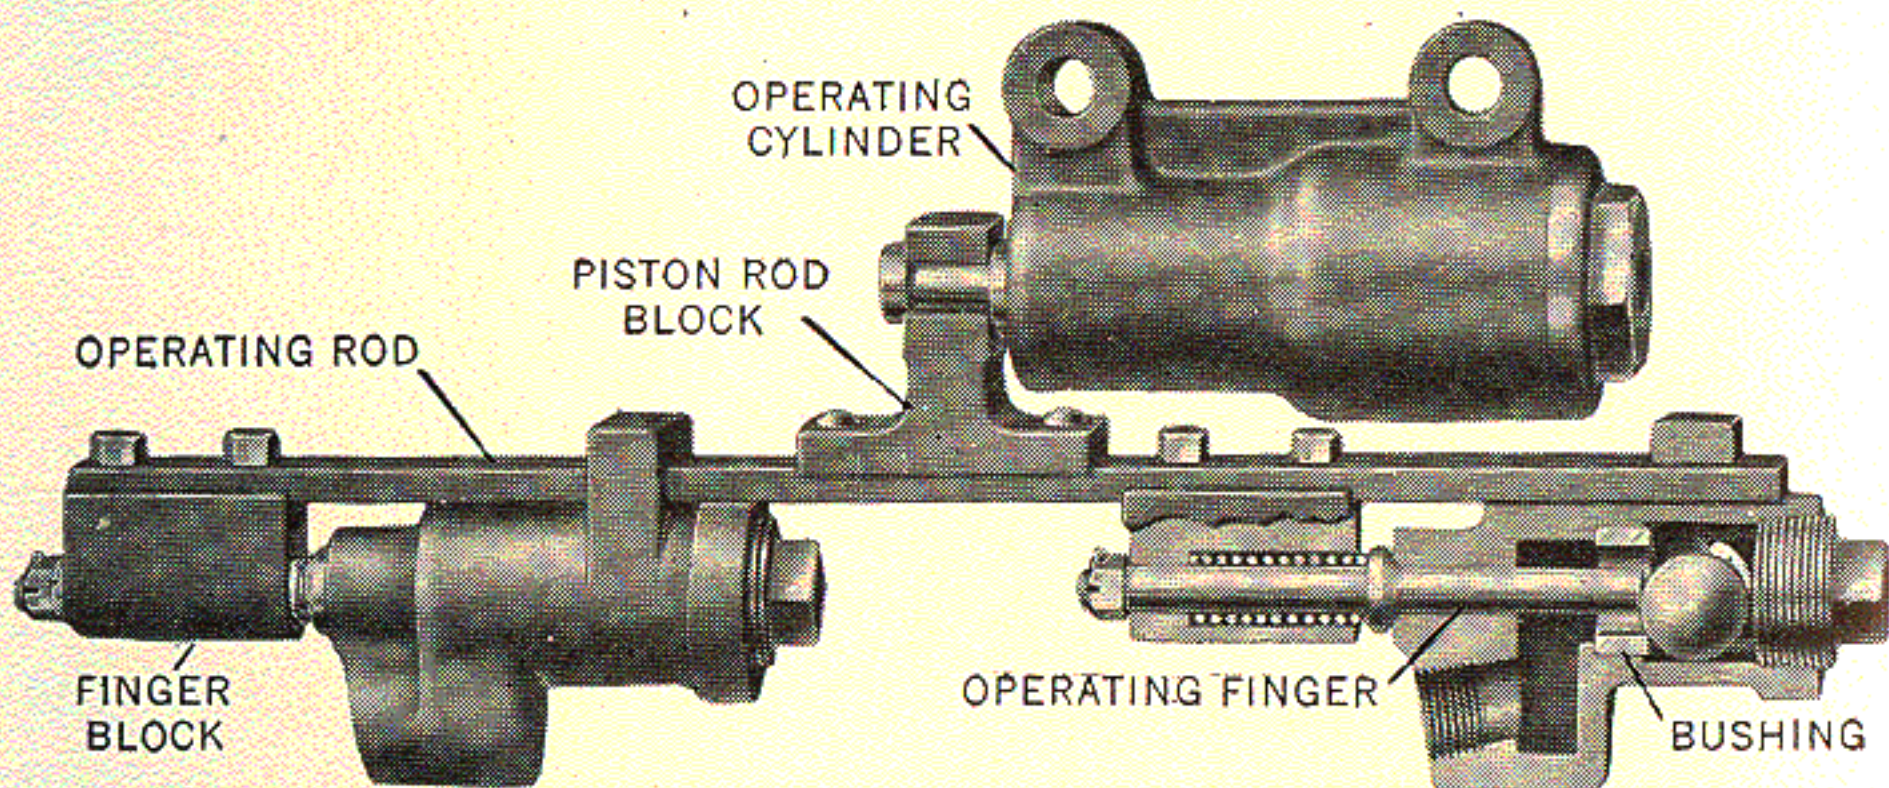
Type C-2 Booster Cylinder Cock Operating Arrangement
